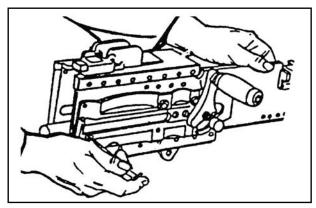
Removal of the barrel buffer group and barrel extension group
